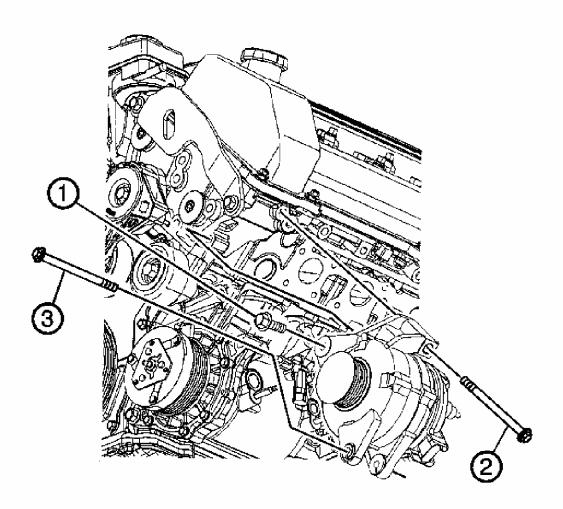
View of Generator Bolts Tightening Sequence Courtesy of GENERAL MOTORS CORP.
